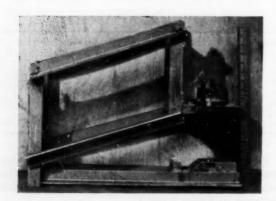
Hand-operated jolt molding machine. Drag pattern is mounted on plate at right.
